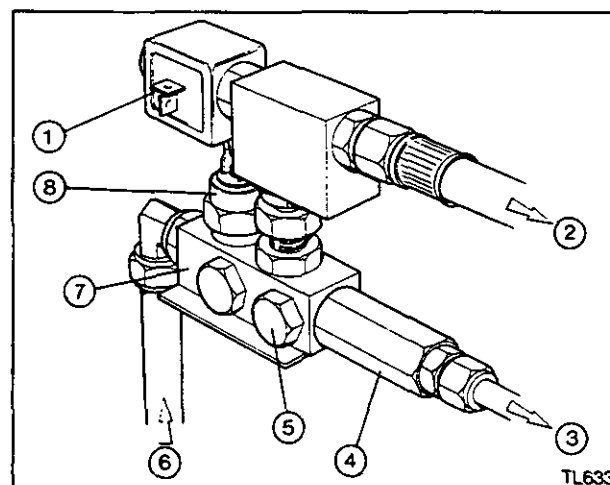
Pressure Maintaining Valve and Multi-Power Solenoid
